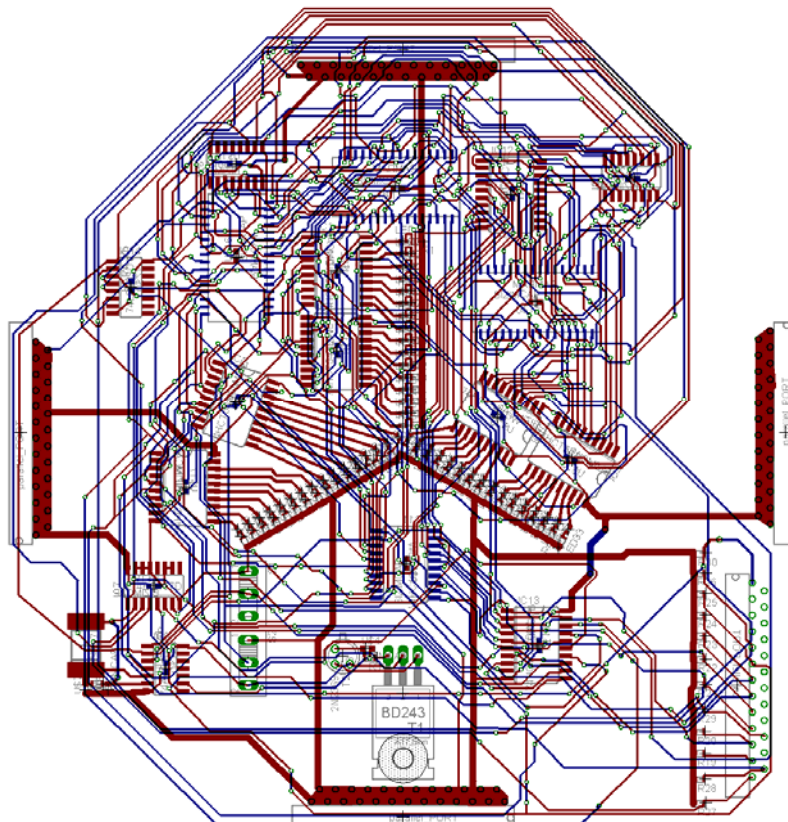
Whole PCB with both TOP and BOTTOM layers.
